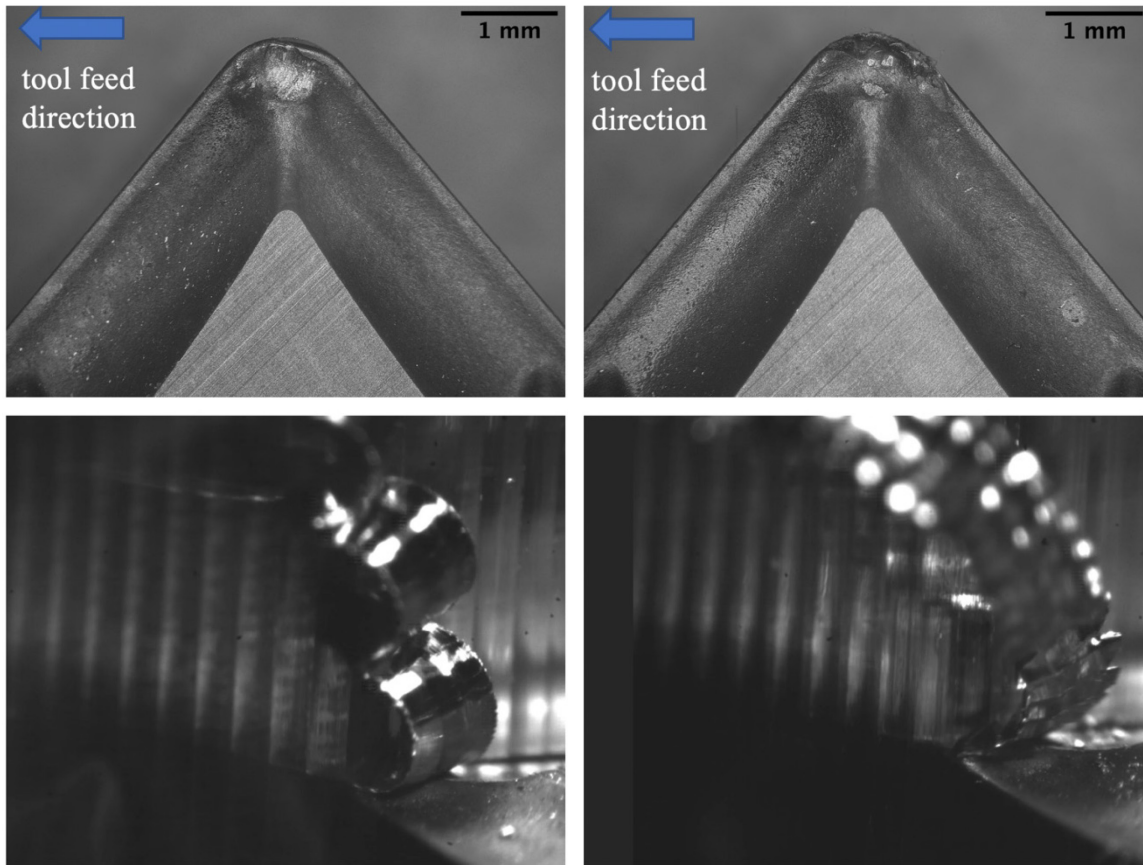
Dry machining with high-speed camera. Worn tool (left), forming an arc-shaped chip. Tool after failure (right) forming a ribbon chip
